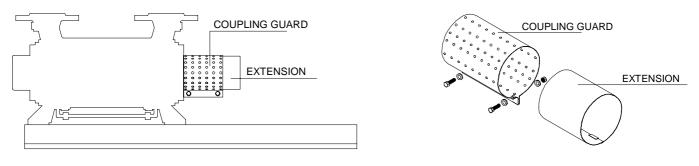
MOUNTING THE UNITS ON THE BASEPLATE
